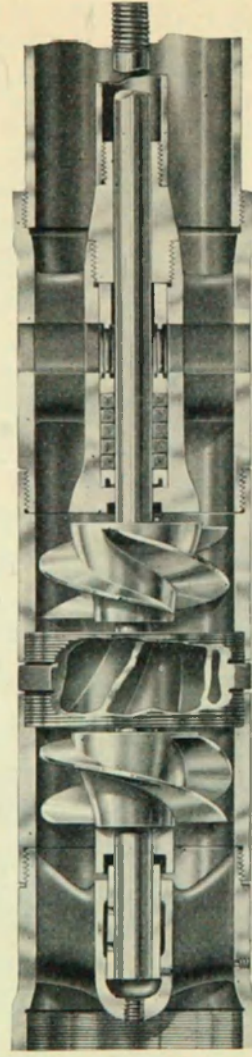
Axial-flow deep-well turbine pump bowl assembly; bearing details same as for centrifugal turbine.
